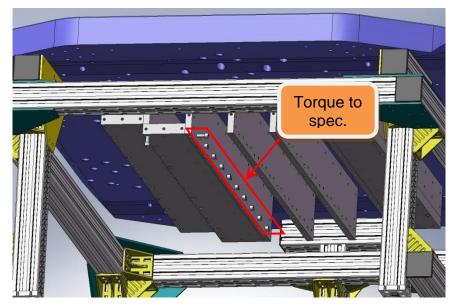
After both of the outer Type 01 horizontal plates are secured, install one of the inner Type 01 horizontal plates. Snug all of the screws for this plate, then torque the side bolts to final spec.
